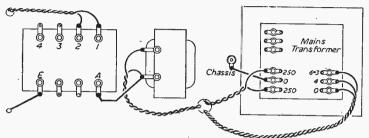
Layout of output transformer, mains transformer and smoothing choke.
